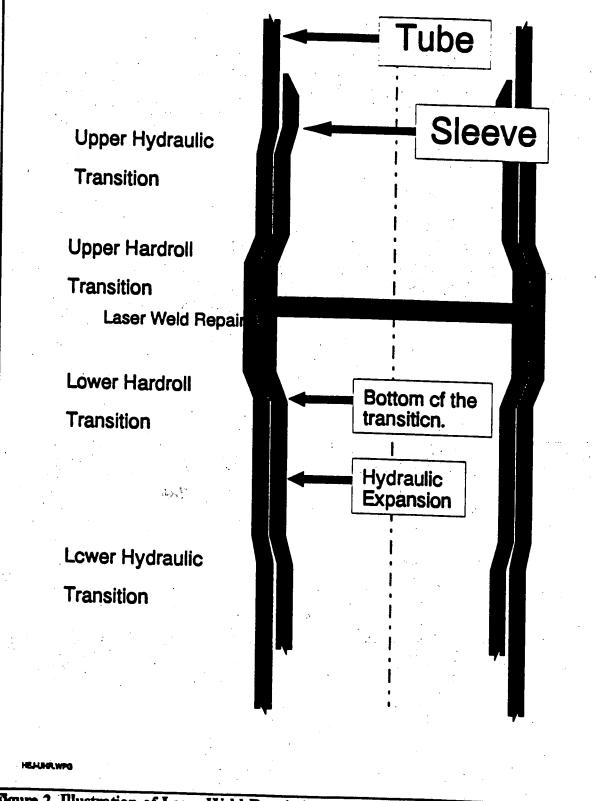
Illustration of Laser Weld Repair in Kewaunee HEJ Upper Joint
